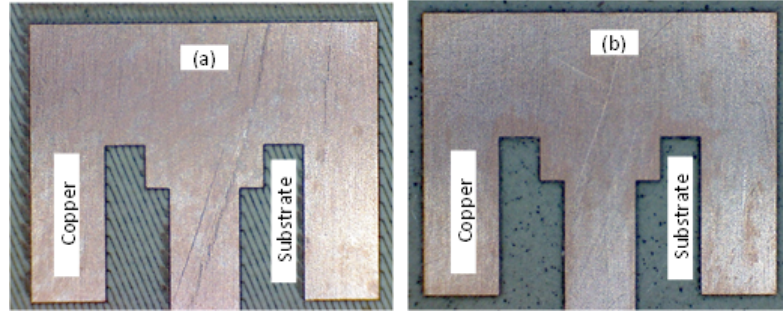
Machining detail (a) Diagonal cut (b) Grid cut
